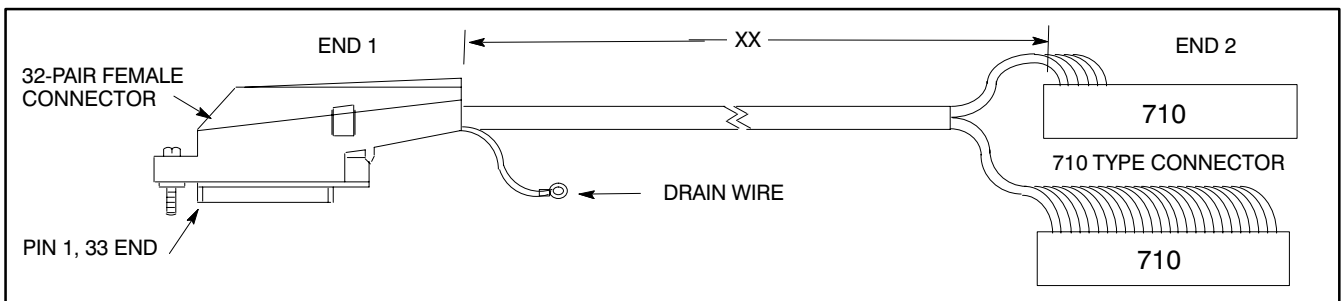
Shelf Connecting Cable Assembly with 710 Type Connector - 003-2977XX
